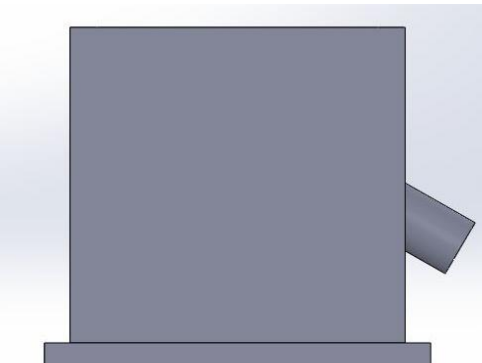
Air Inlet Pipe At 30° Inclined Horizontally- Cooling Tower Model
